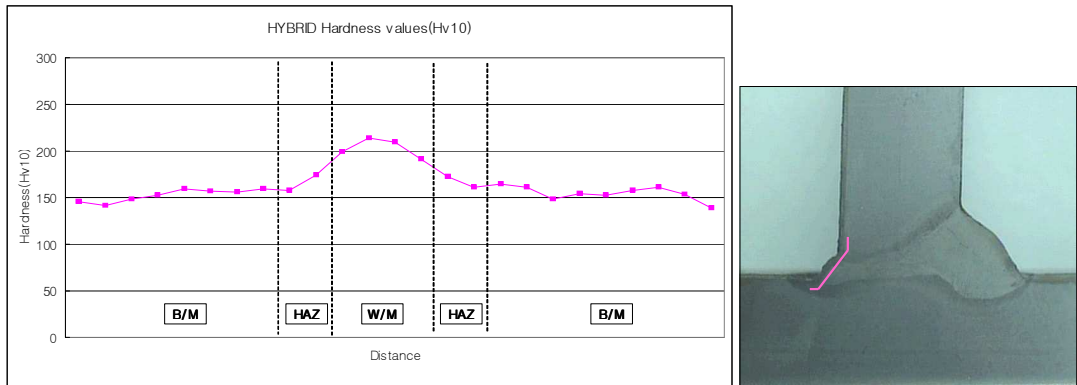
Hardness values in Hybrid(Laser) Welding
